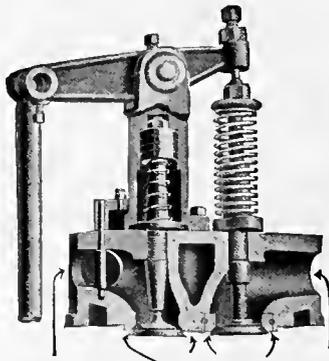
Section of Oil Engine Cylinder Head to show valve arrangement.
